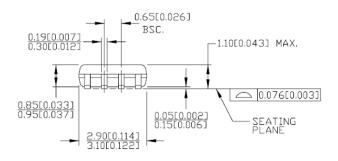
8-Pin Thin Shrunk Small Outline Package (4.40 MM Body) Z8
